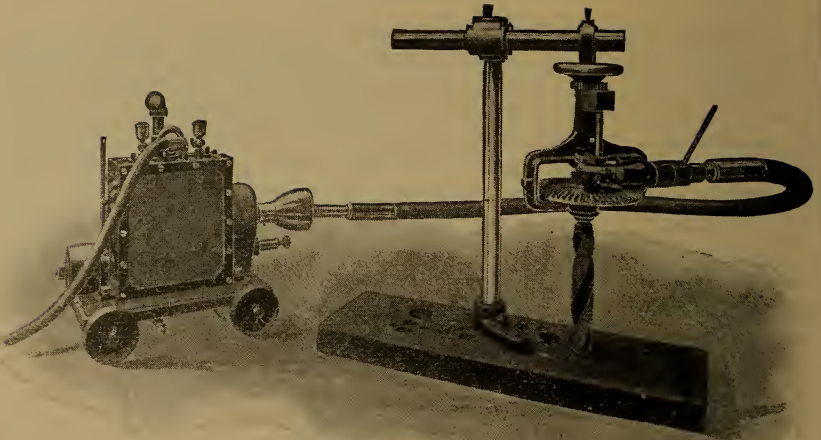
STOW FLEXIBLE SHAFT AND MOTOR.
